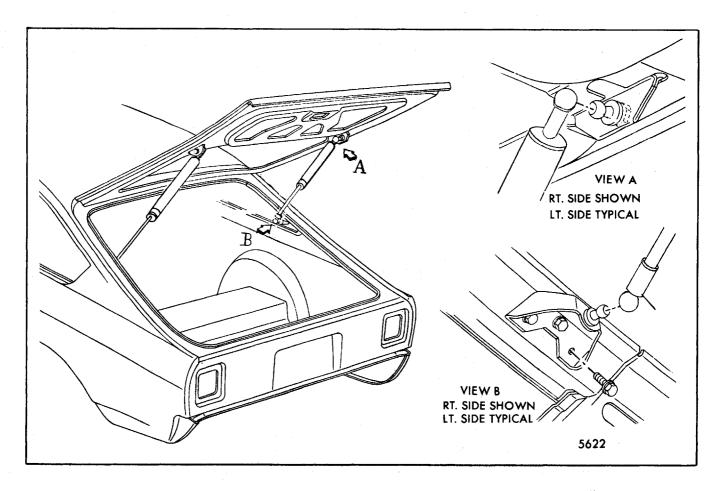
Hatchback Lid Support Assembly Attachment - H-77 Shown, H-07 and X-17 Similar
